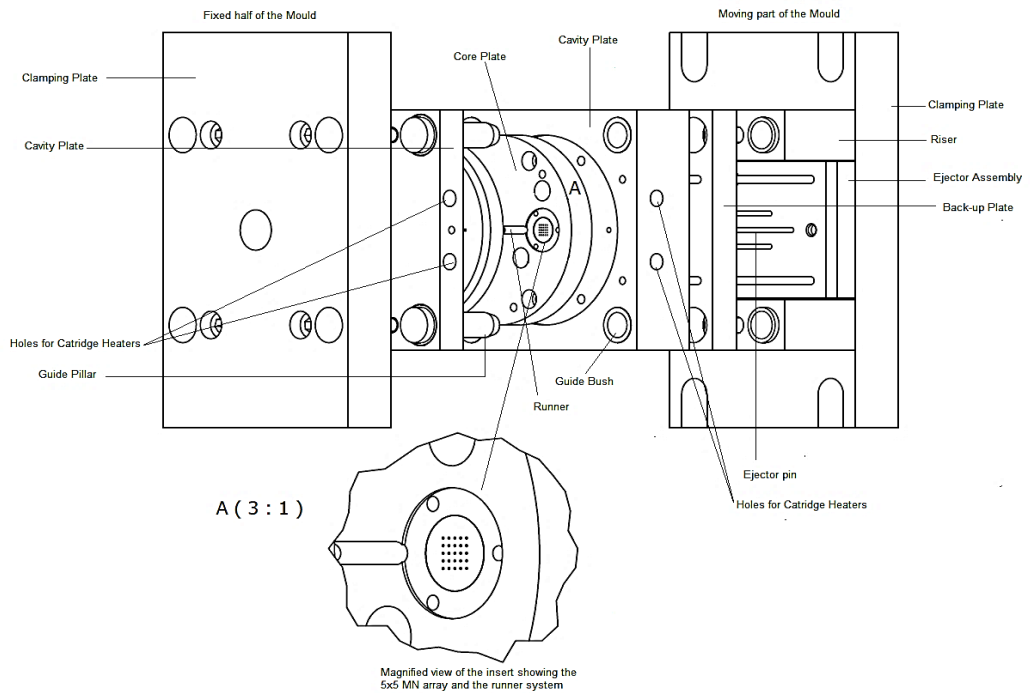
Technical drawing of the 2-plate mould showing the MN insert.
